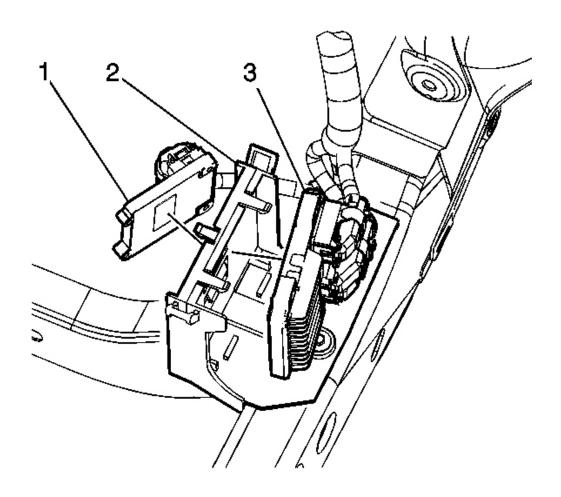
View Of Engine Control Module (ECM) Bracket Courtesy of GENERAL MOTORS CORP.
